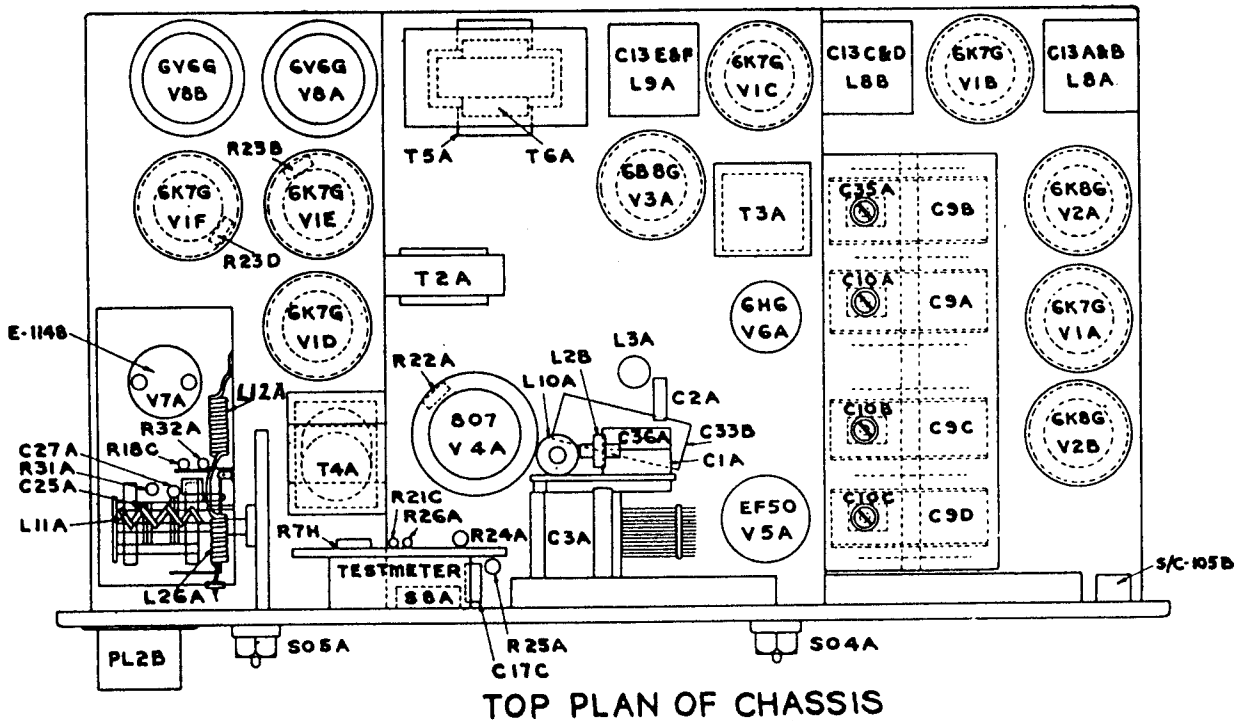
VALVE POSITIONS (Top View of Chassis)
